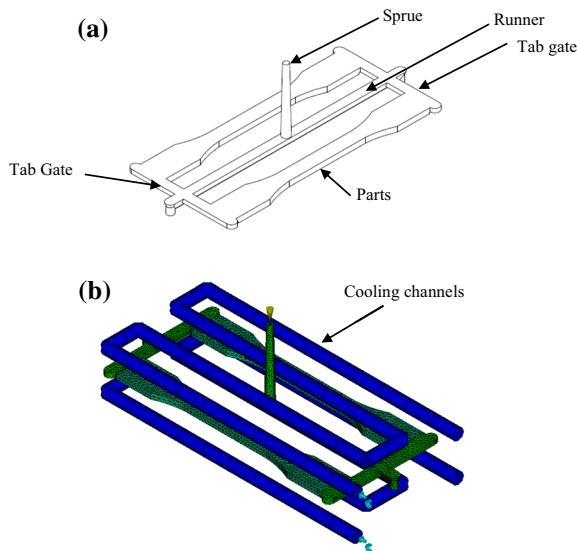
Thick flat part; a feed system design using tab gate; b cooling channel design
